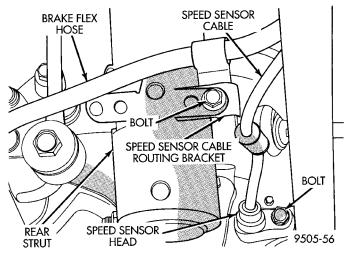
Speed Sensor Head Attachment To Disc Brake Adapter
